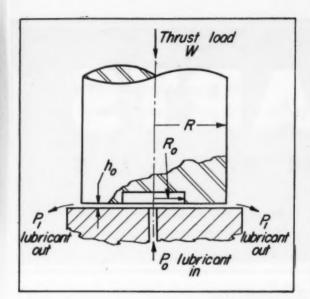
Left—Elements of a hydrostatic step bearing which maintains a surface separating film even when the bearing is not rotating
